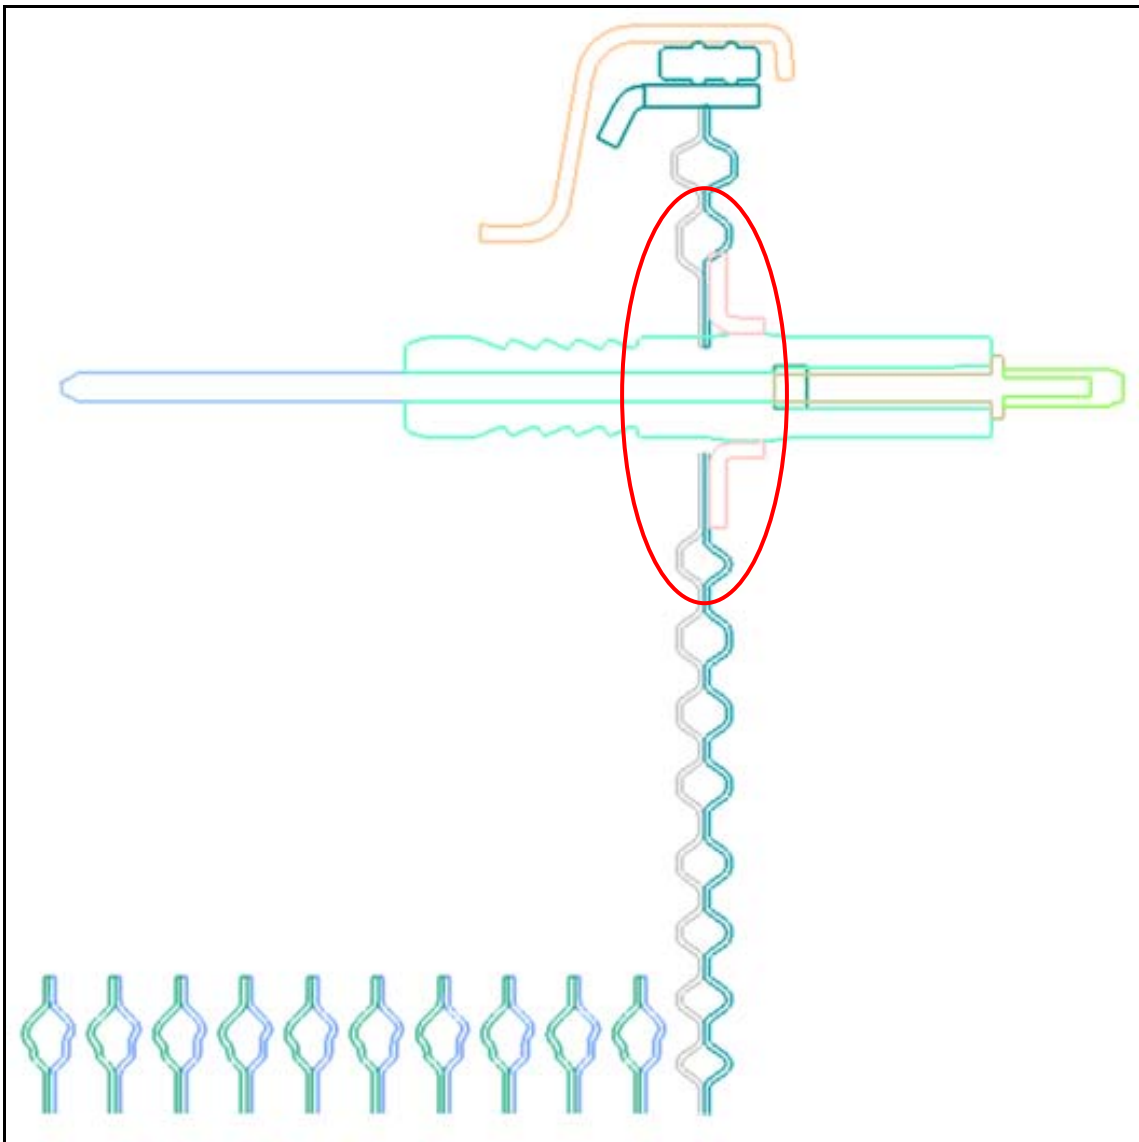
Assembly of the igniter in the front module of the heat exchanger
